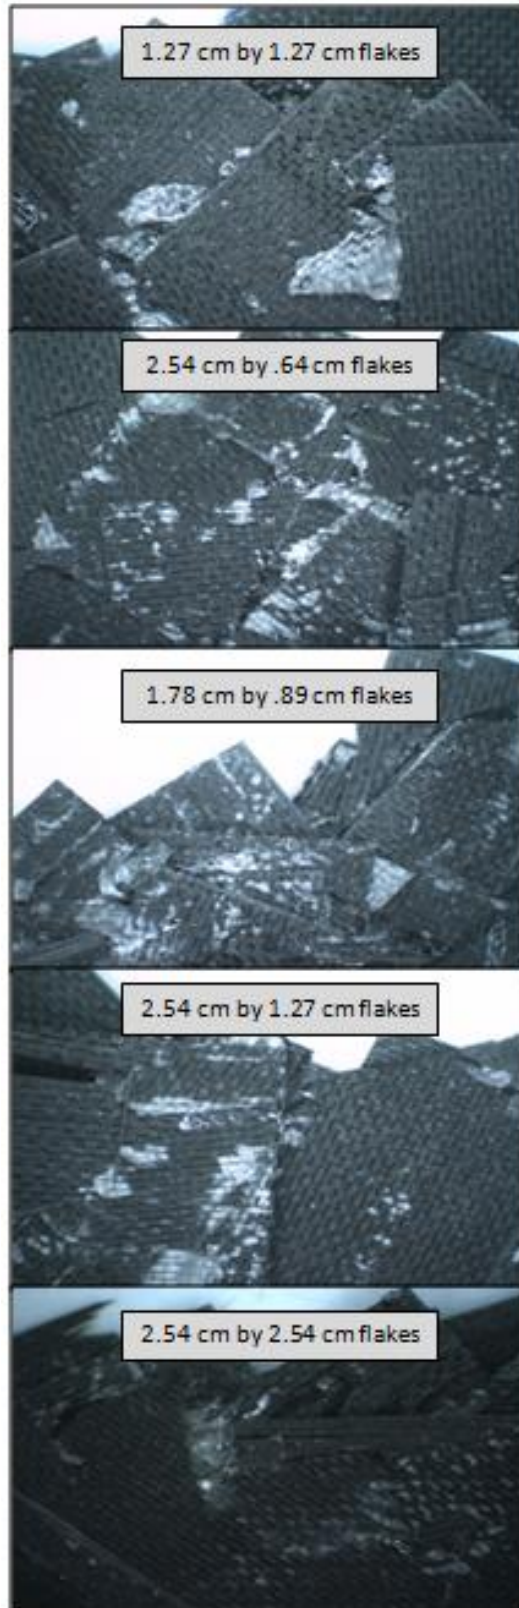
Fracture surfaces of single ply flake/vinyl ester flexure specimens
